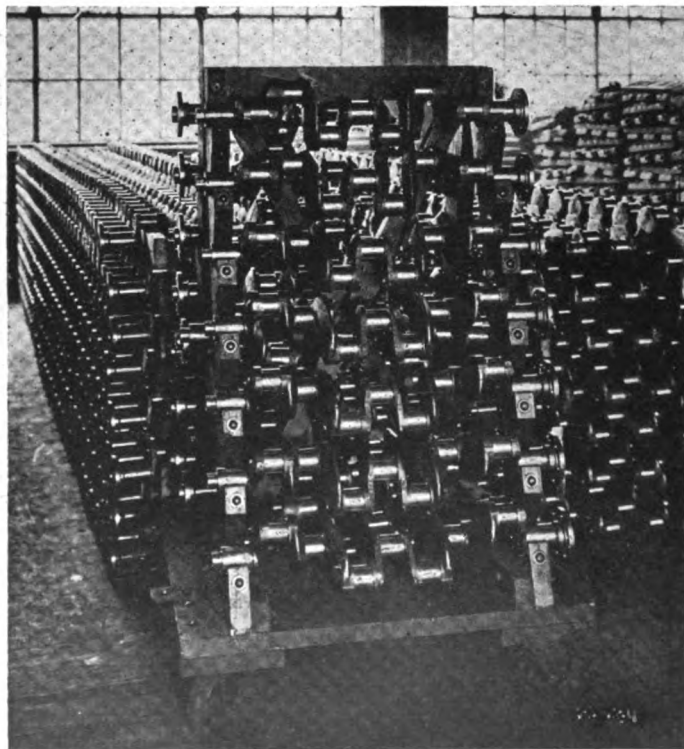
Crankshafts in finished stock; also type of rack used for handling crankshafts in the grinding department
